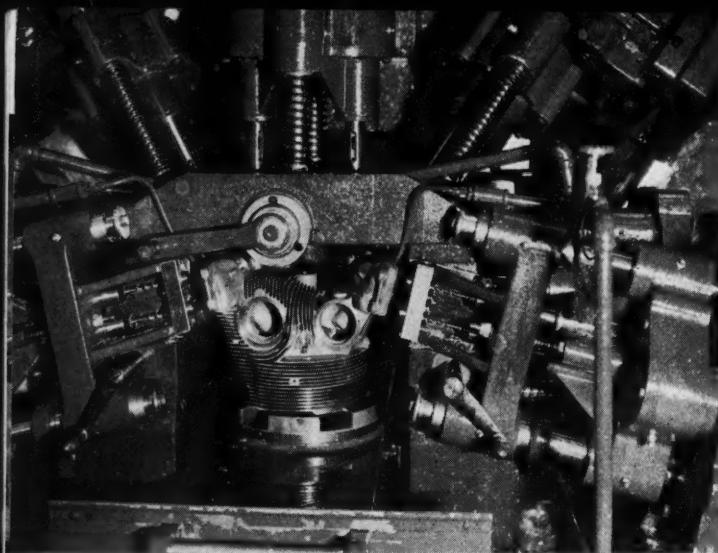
A Five - Way Drilling Machine of Special Design, Equipped with Multiple Heads on Each Spindle, is Used to Drill the Holes in the Cylinder Head
